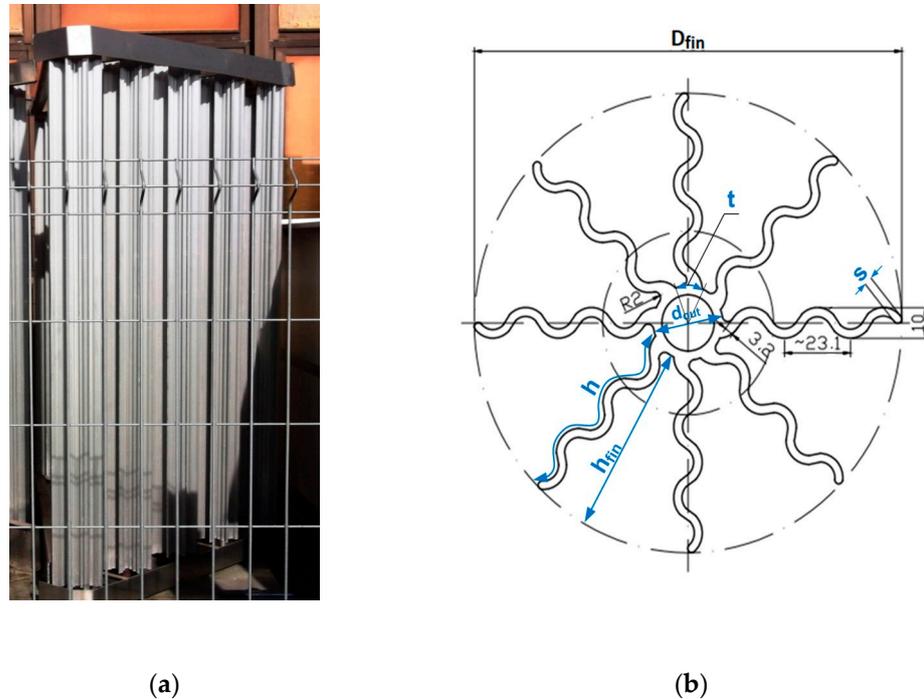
Heat pump evaporator: (a) view of the example design; (b) cross section of the aluminium profile mounted on the copper tube of the evaporator.
